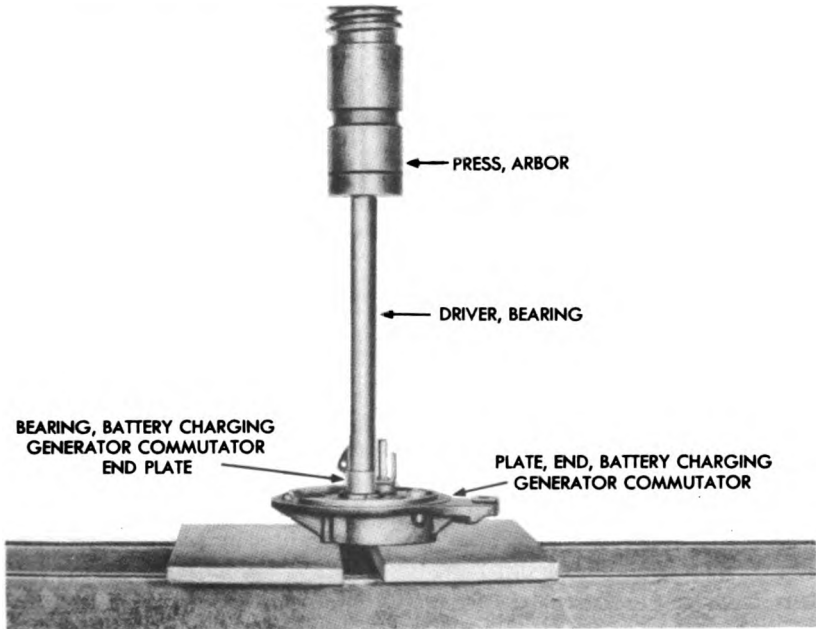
Pressing Commutator End Plate Bearing into End Plate RA PD 44001
